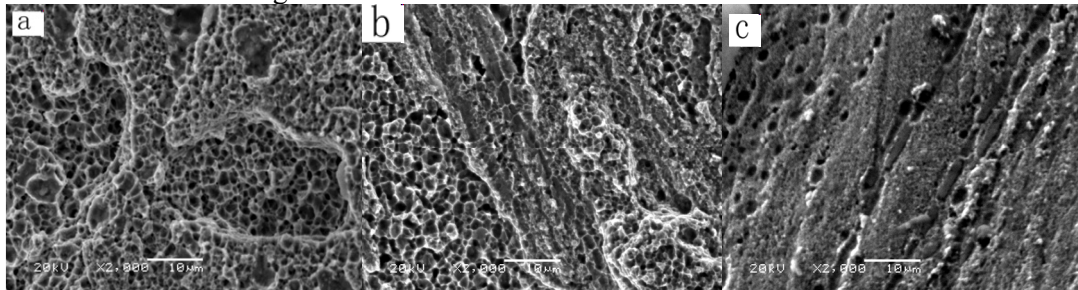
Joint fracture morphology (a.upper parts of weld; b.middle of weld; c.lower parts of weld)
